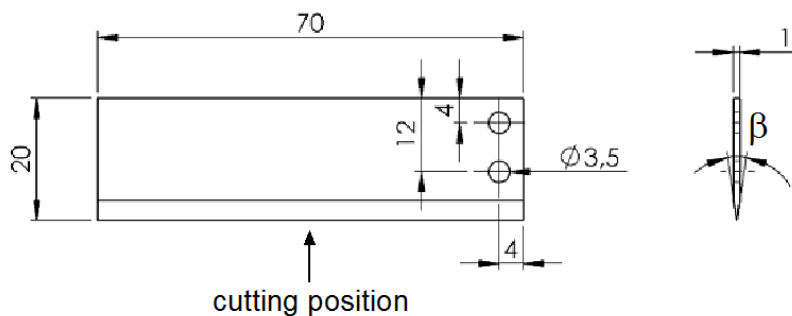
Cutting blade with dimensions (in mm) and wedge angle β ; arrow indicates the cutting position of the blade.
